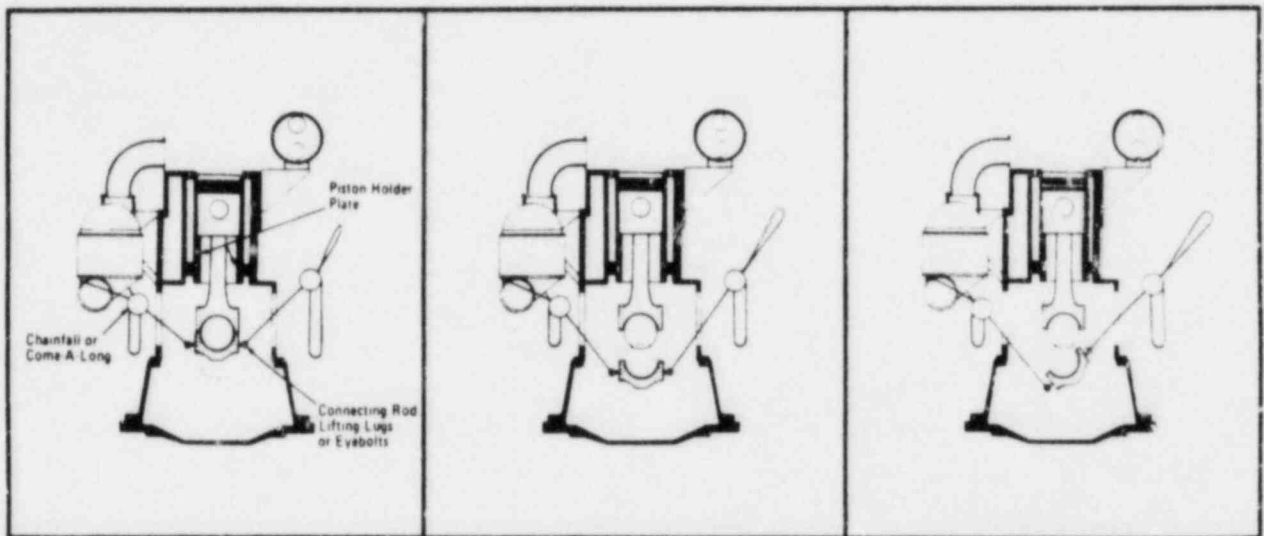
C-3. Removing Connecting Rod Bearing Cap
